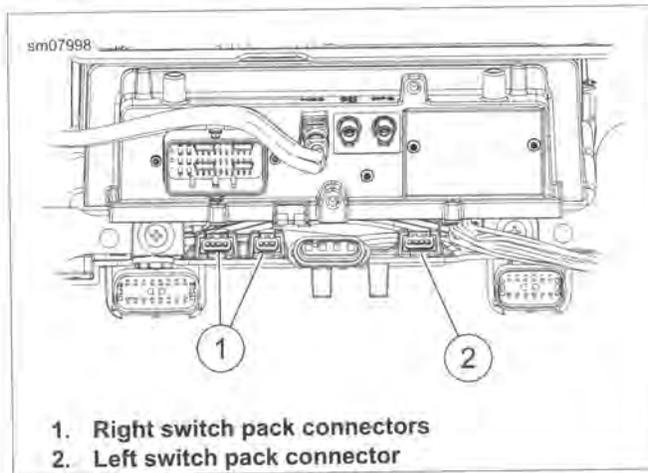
Handlebar Switch Pack Connectors: Fairing Models
